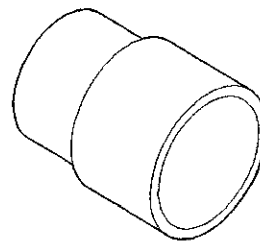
Crankshaft Sprocket Installer Tool MD990799
